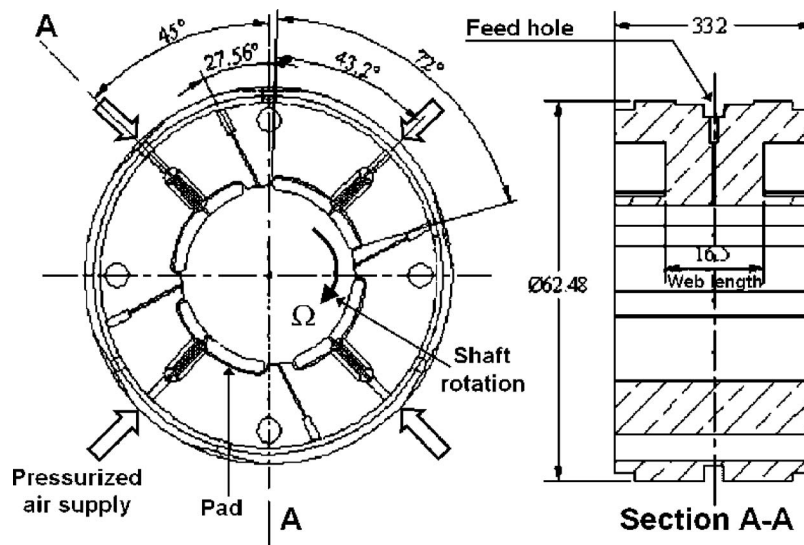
Dimensions of flexure pivot tilting pad hydrostatic bearing (units: mm)
